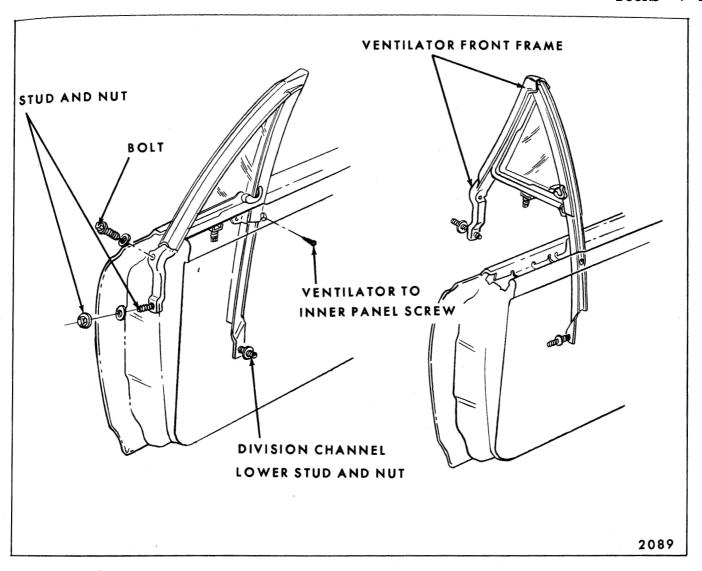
Front Door Ventilator Removal - "A" Style Shown - "X & Z" Similar
